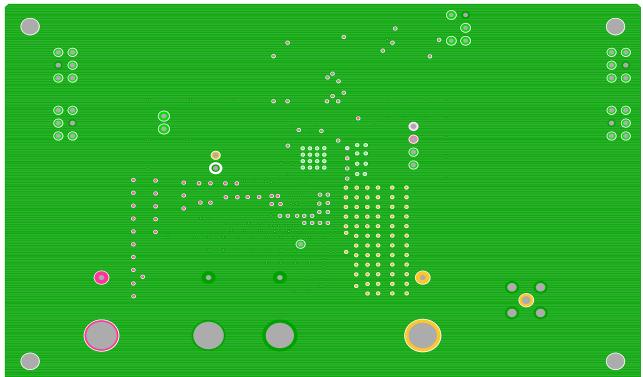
PCB - INNER LAYER - LAYER 2 (TOP VIEW)
